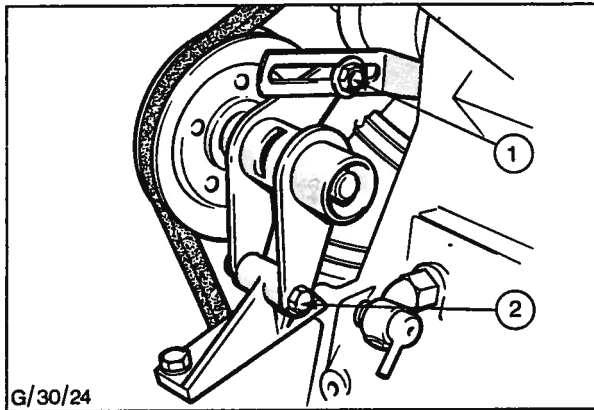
Drive Belt Adjustment - No Alternator Fitted
